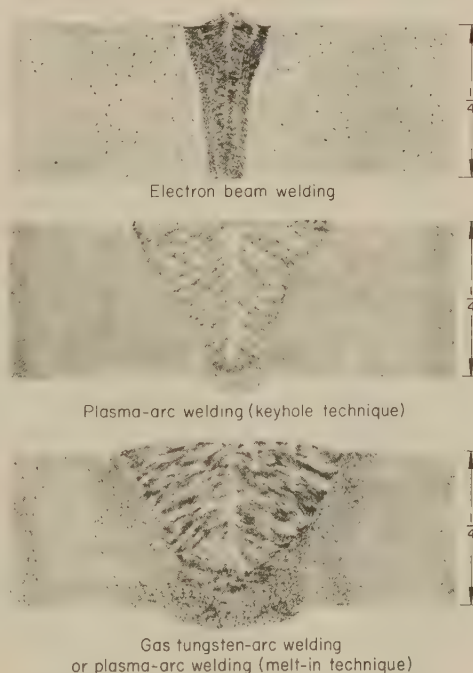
Typical fusion-zone widths for electron beam welding, plasma-arc welding (keyhole technique), and gas tungsten-arc welding
